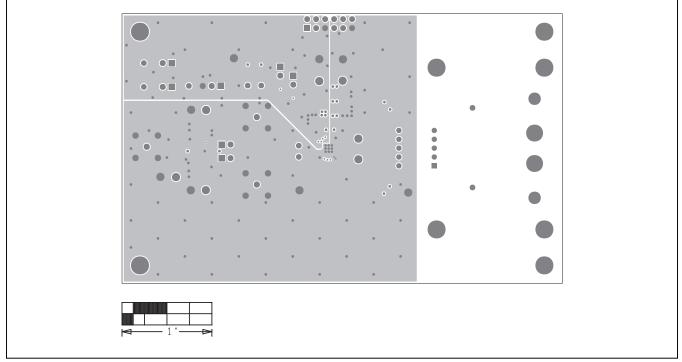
MAX44211 EV Kit PCB Layout—Inner Layer 2
